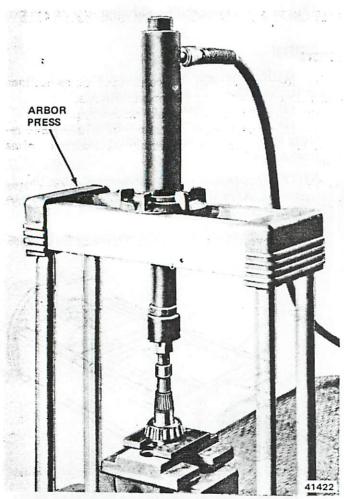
F-21 Axle Shaft Bearing Removal-CJ and Scrambler Models
